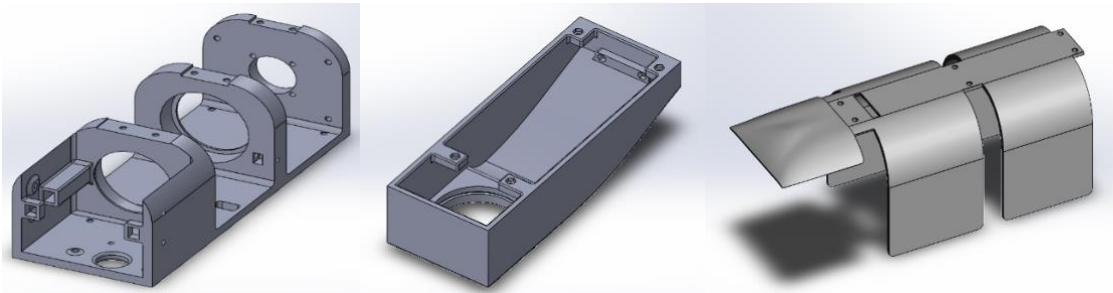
Mechanical Bracket (left), Electrical Housing (middle), Cover (right)
